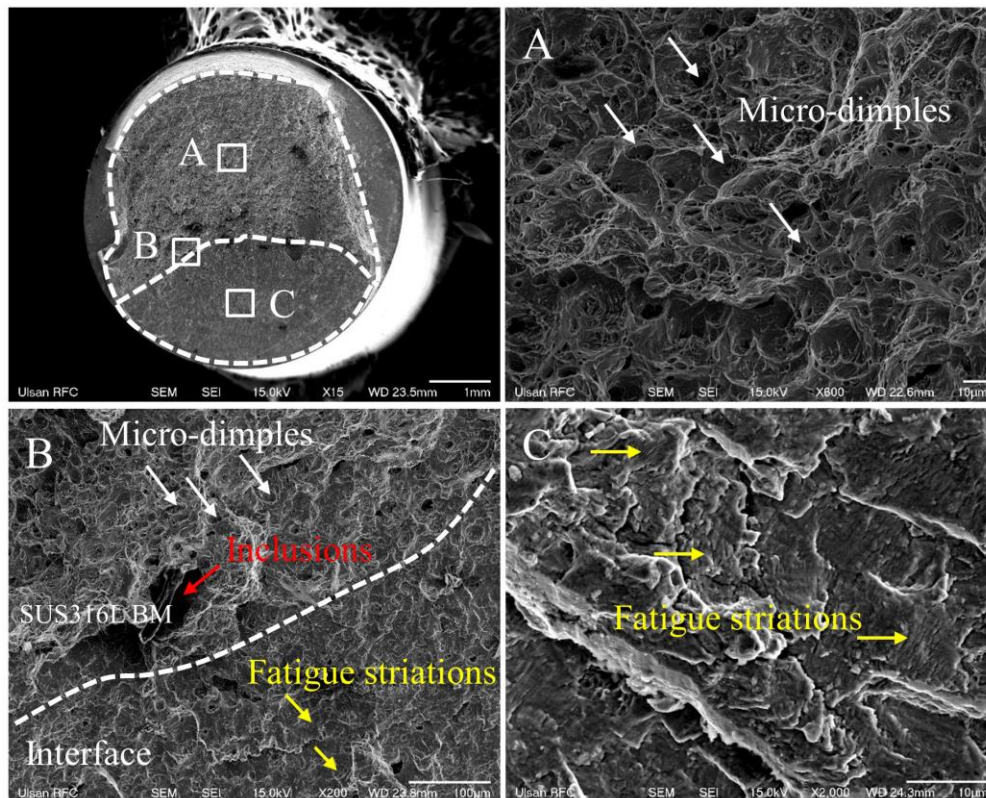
Fracture appearance of the failed specimen under 600 MPa
